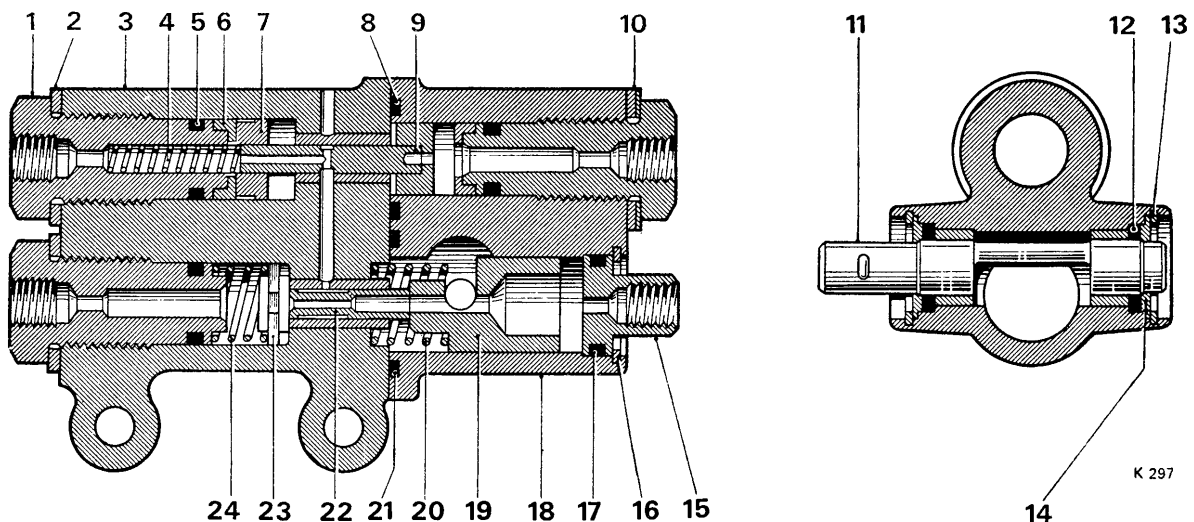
SECTIONAL VIEW—REAR HEIGHT CONTROL VALVE
